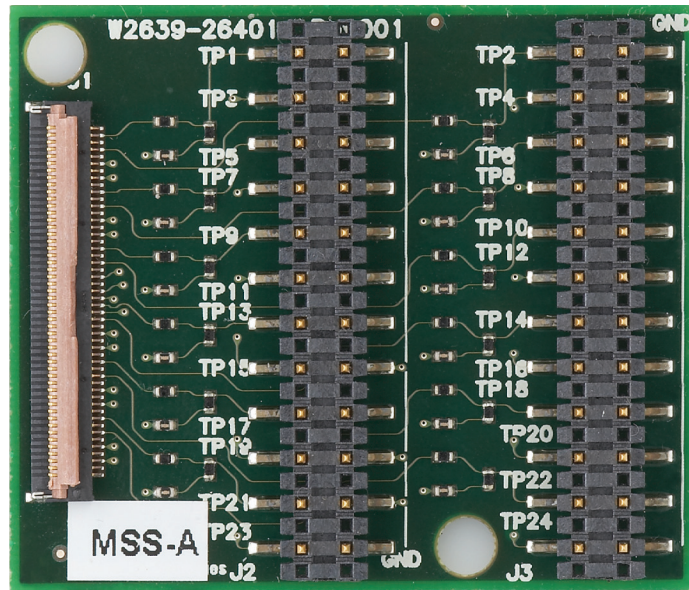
W2639A LPDDR scope probe adapter board with test points for connection to oscilloscope
